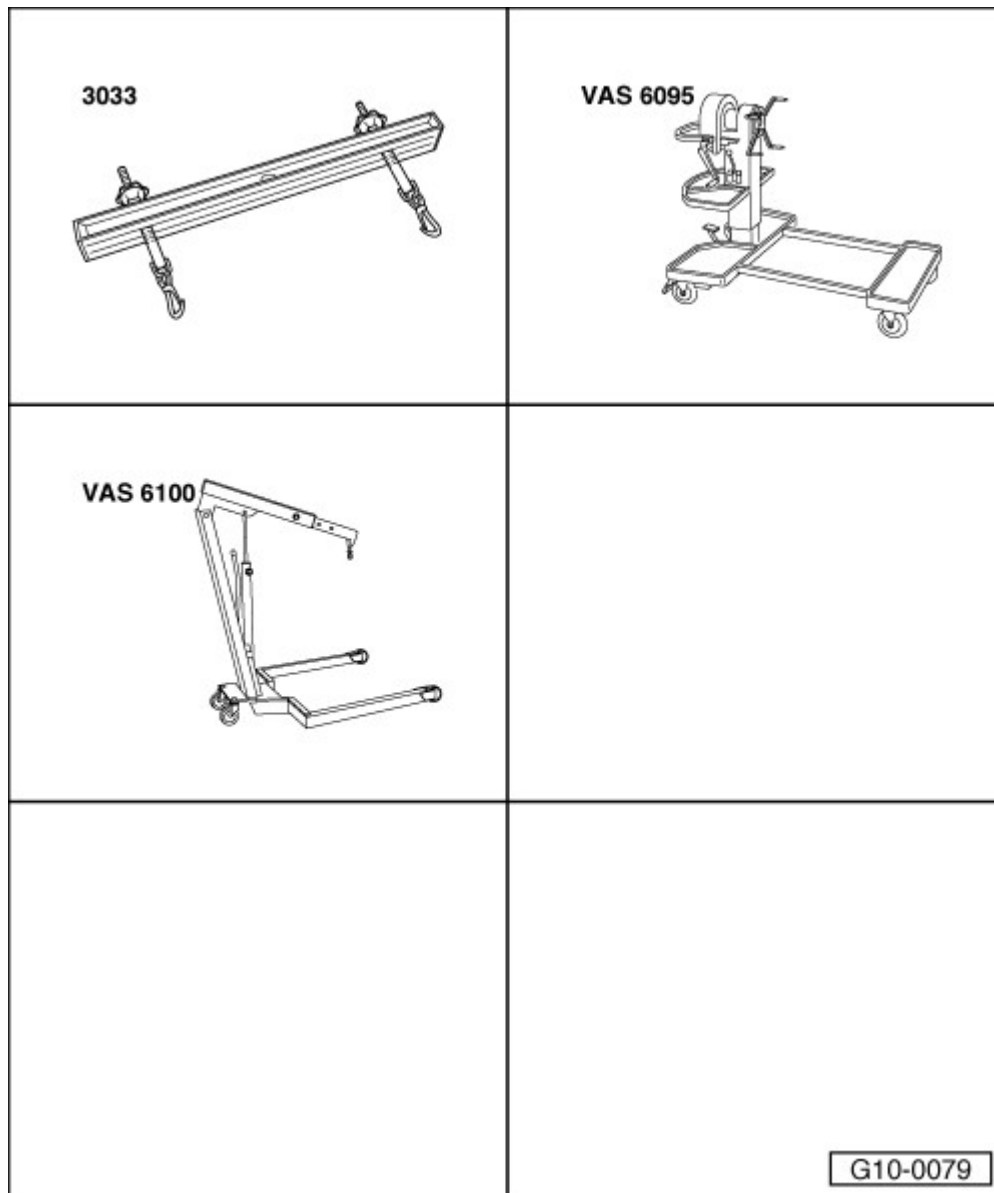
Identifying Special Tools - Engine, Securing To Assembly Stand
